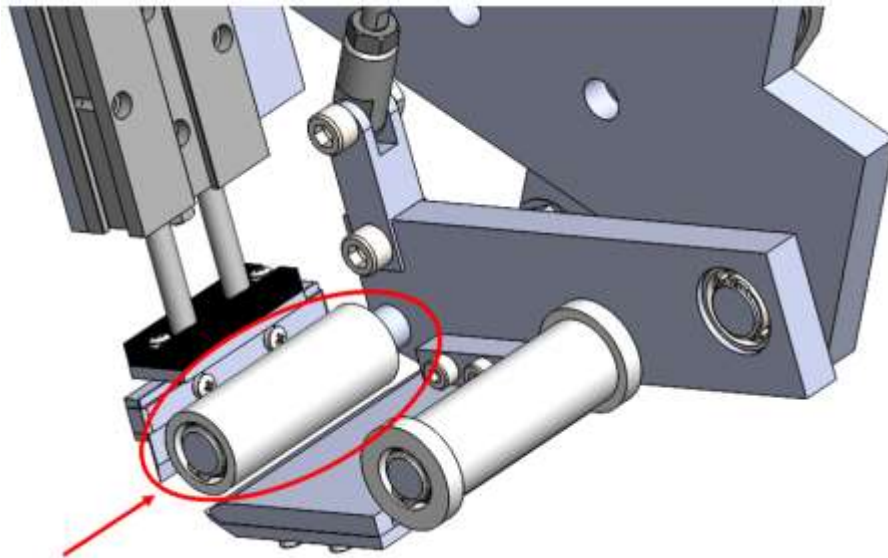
Friction roller selection for rotating unit in tape sticking mechanism
